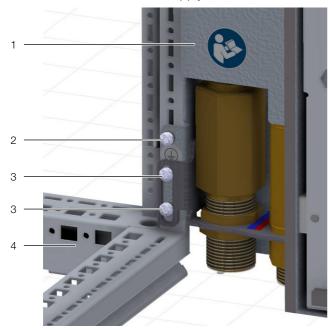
Mounting the LCP Hybrid – Inside bottom
